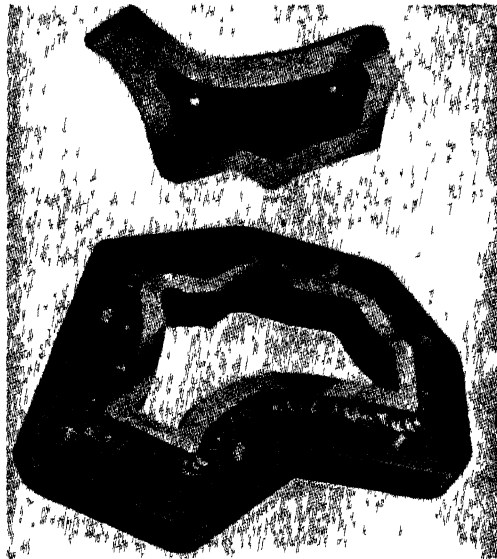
Ready for finishing, the punch and die have only  $\frac{1}{8}$  in. of stock to be removed.
